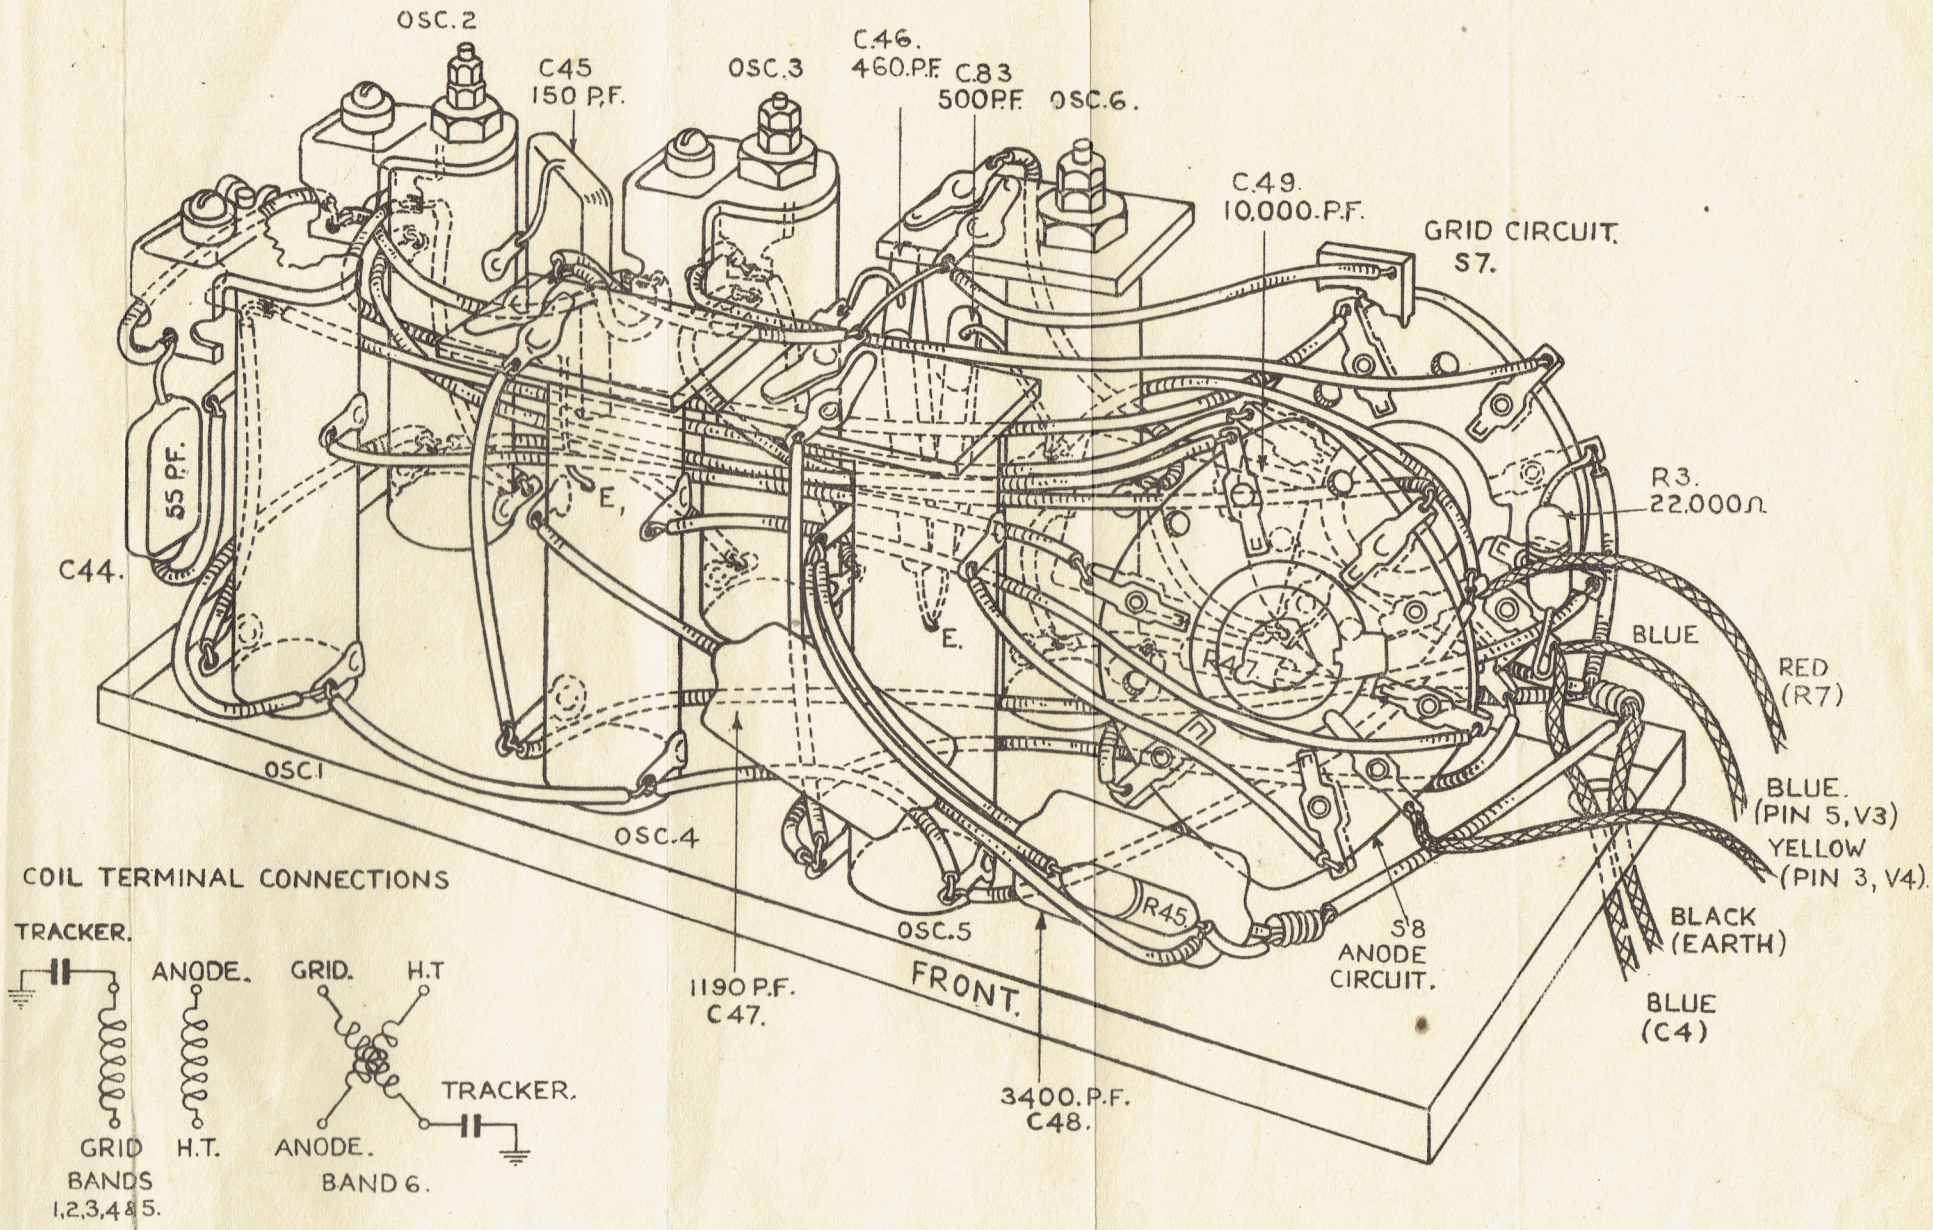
COIL ASSEMBLY. OSCILLATOR SECTION.
